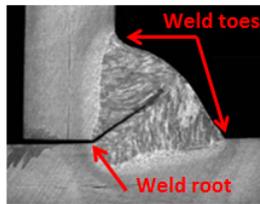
Crack initiation sites, weld toes and weld root
